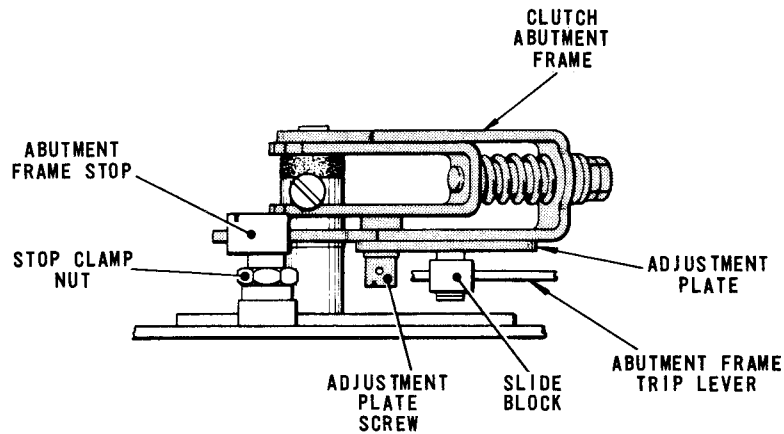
TRANSLATOR CLUTCH ABUTMENT MECHANISM
